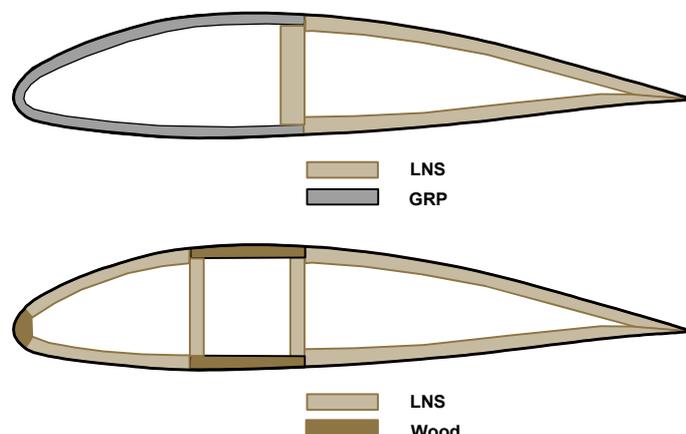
Two examples of the rotor blade cross section which have been investigated in the design study.
